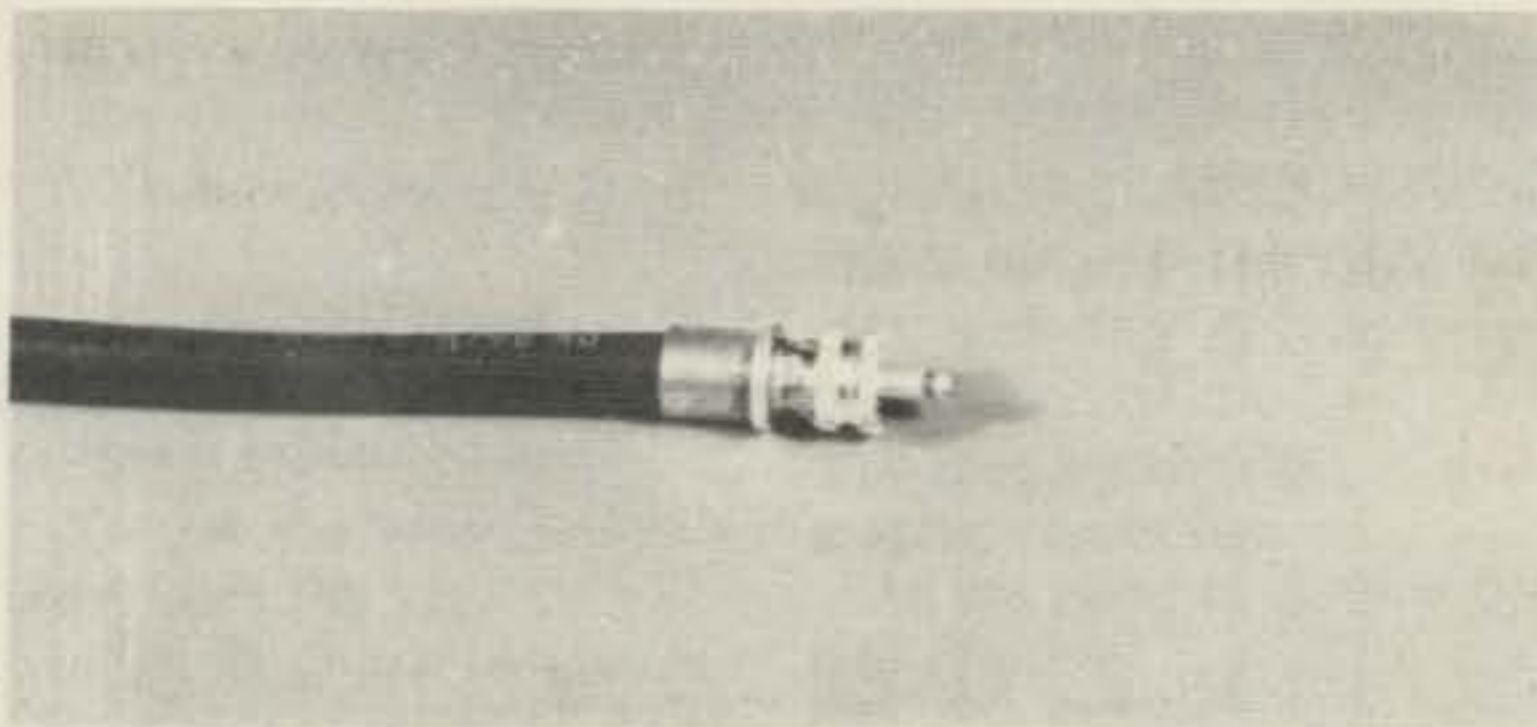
Photo C. Soldered connector with all holes filled. Use plenty of heat.
